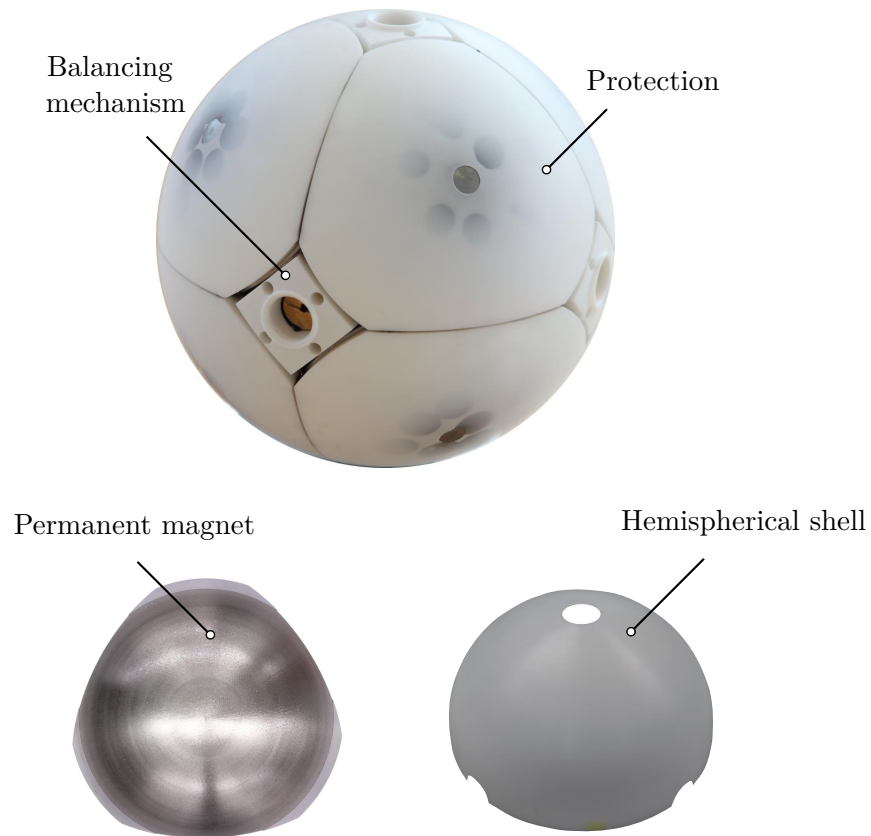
(Top) Manufactured rotor without hemispherical shells. (Bottom-left) Machined permanent magnet. (Bottom-right) Hemispherical shell.
